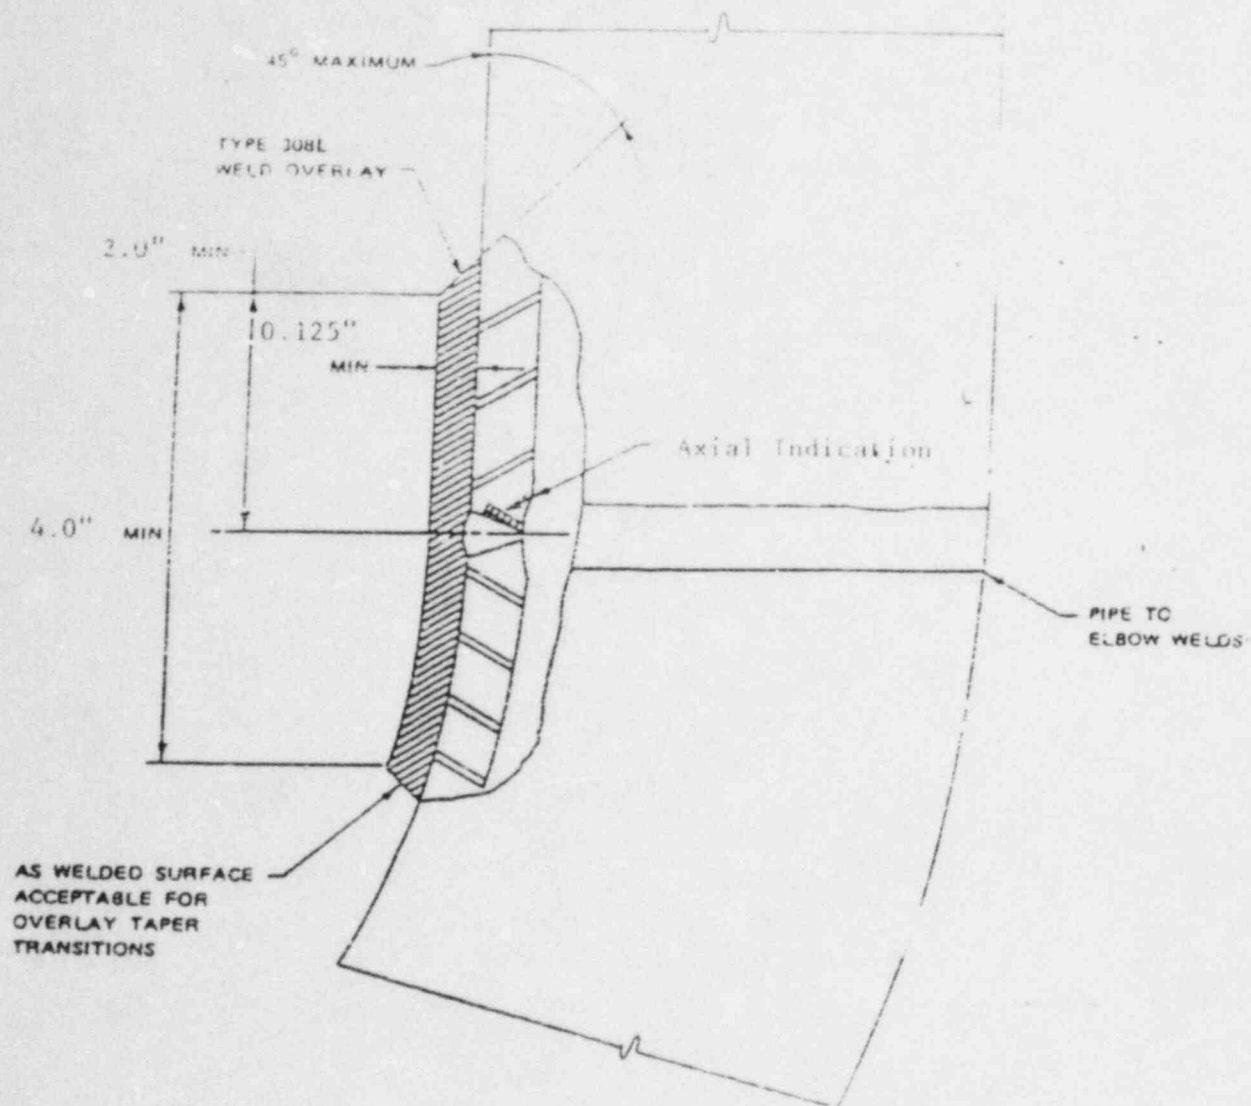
Vermont Yankee Weld 1A Flaw Evaluation
